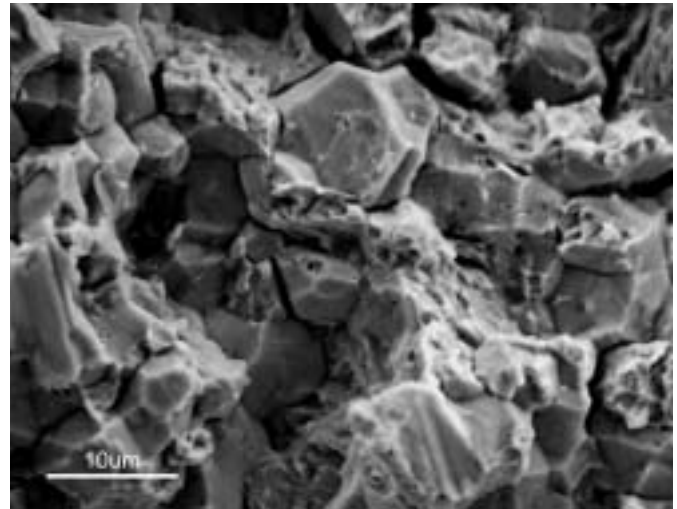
Intergranular region of the fracture surface around the outer circumference of the bolt.
